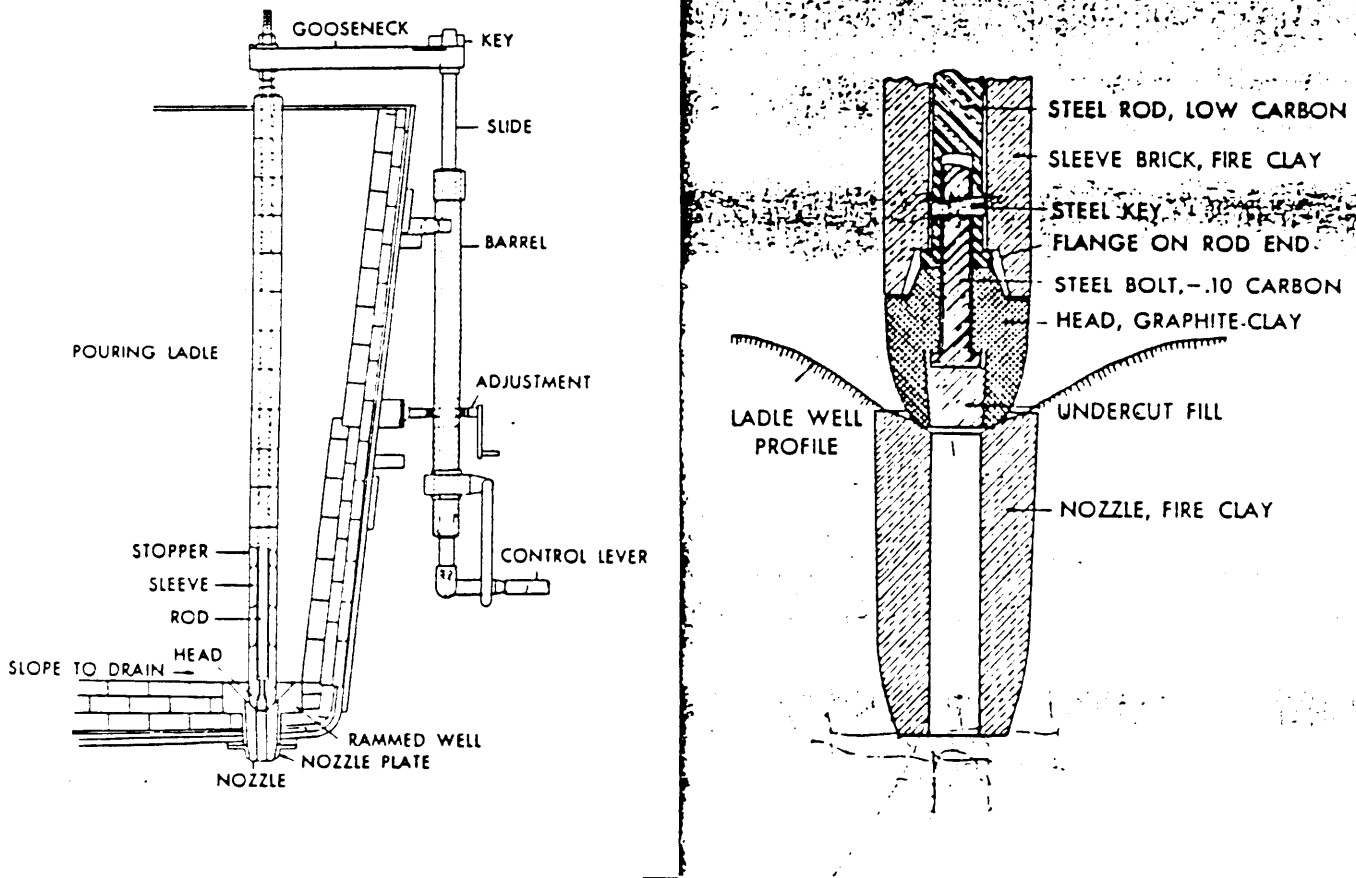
Section of typical bottom pour steel ladle and details of a graphite stopper assembly (courtesy Vesuvius Crucible).
